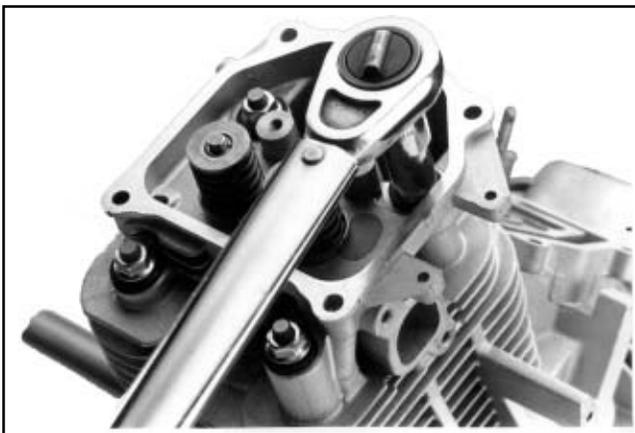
Torquing the Cylinder Head Mounting Nuts (Stud Design).
